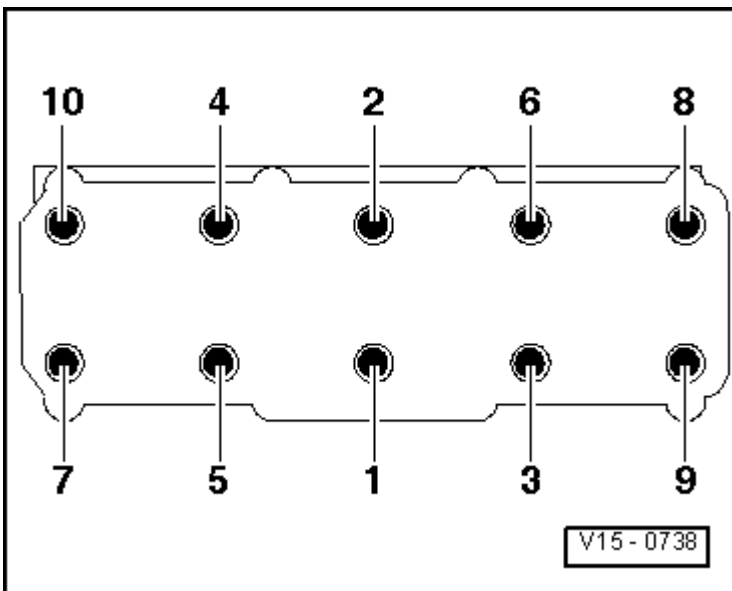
Identifying Cylinder Head Bolt Tightening Sequence
